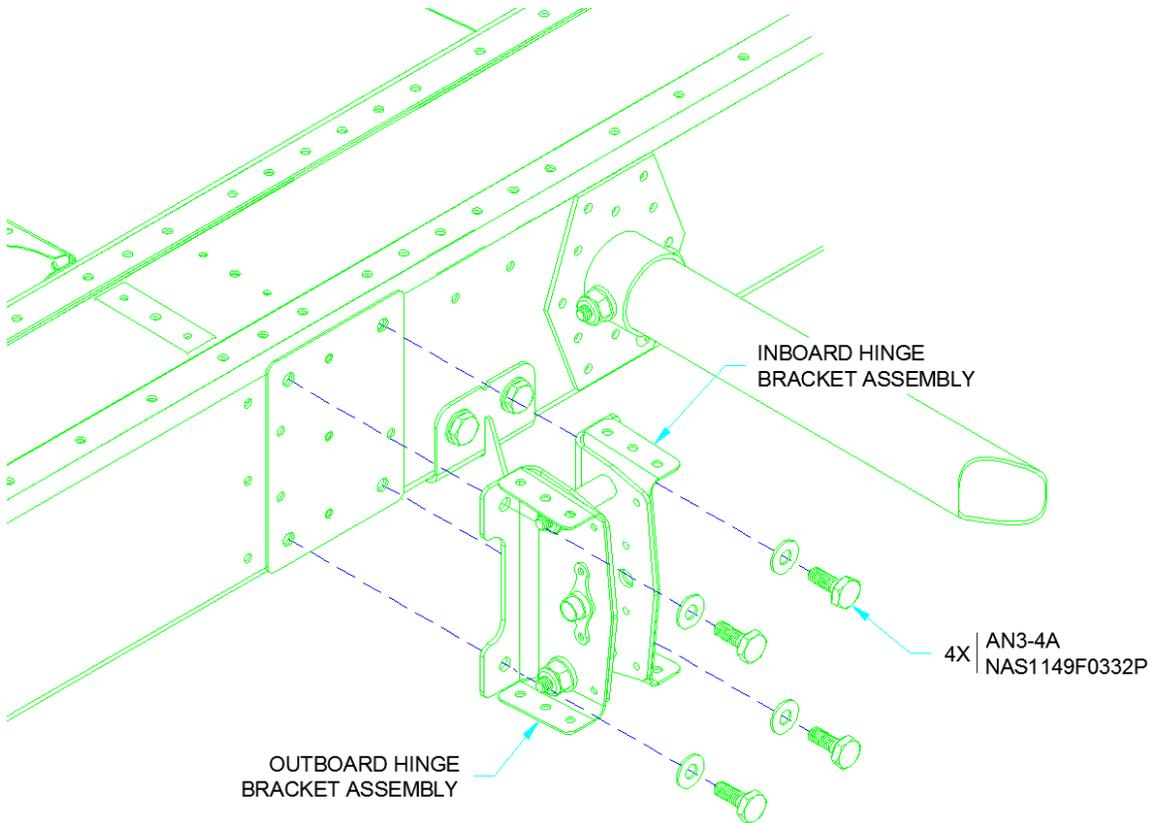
ATTACHING THE HINGE BRACKET ASSEMBLIES TO THE MAIN SPAR
